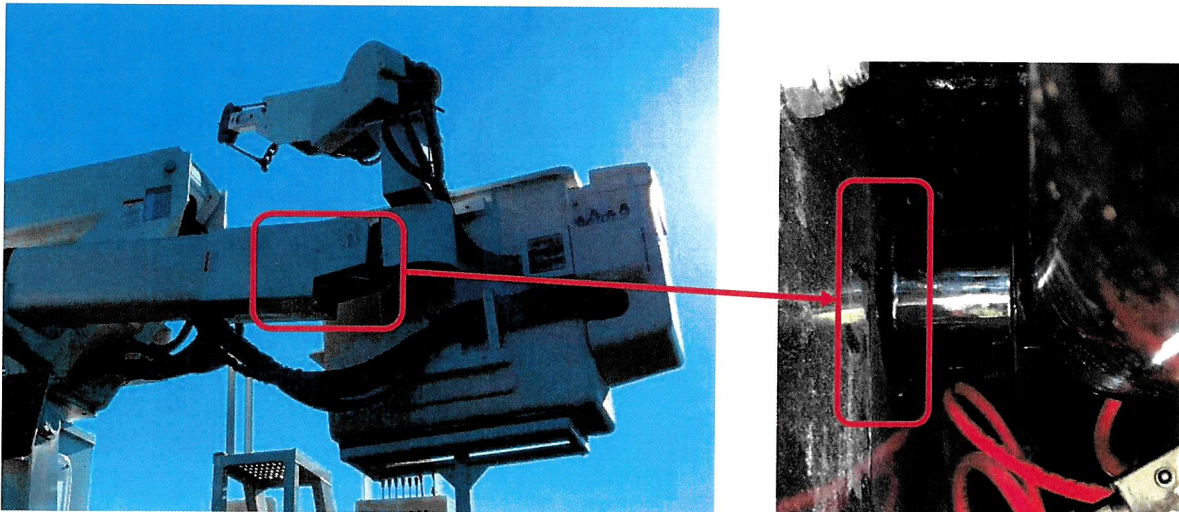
Welds to Inspect, Both Sides of Leveling Cylinder
